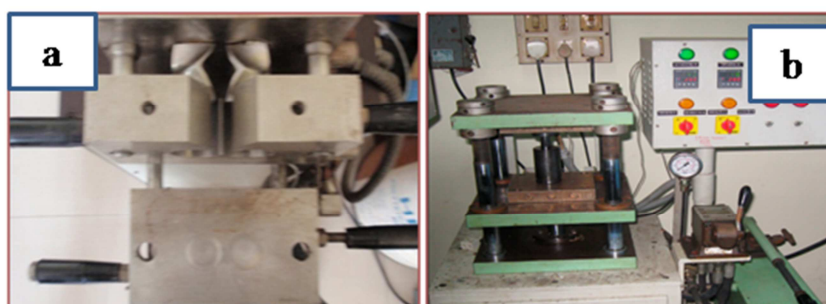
Photographic images of (a) kneading machine (b) hot press
